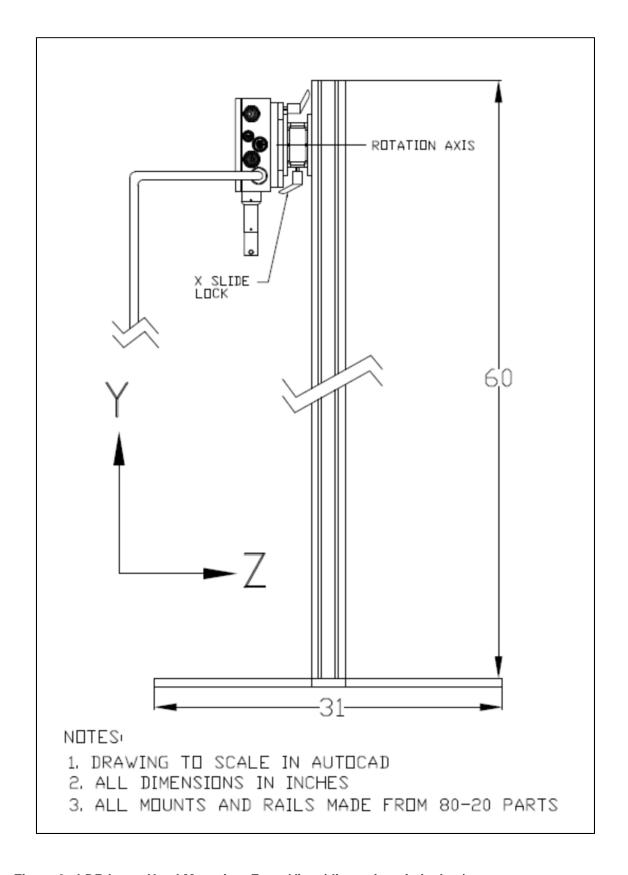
LDR Laser Head Mounting, Front View (dimensions in inches)
